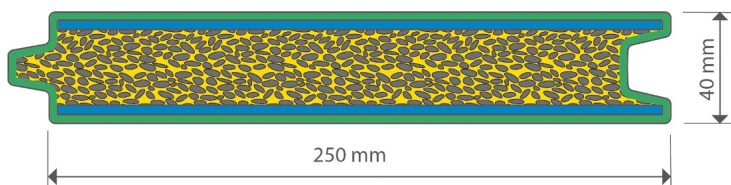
Cross section of retaining wall profile from EoU composite (obtained by ten Busschen).
